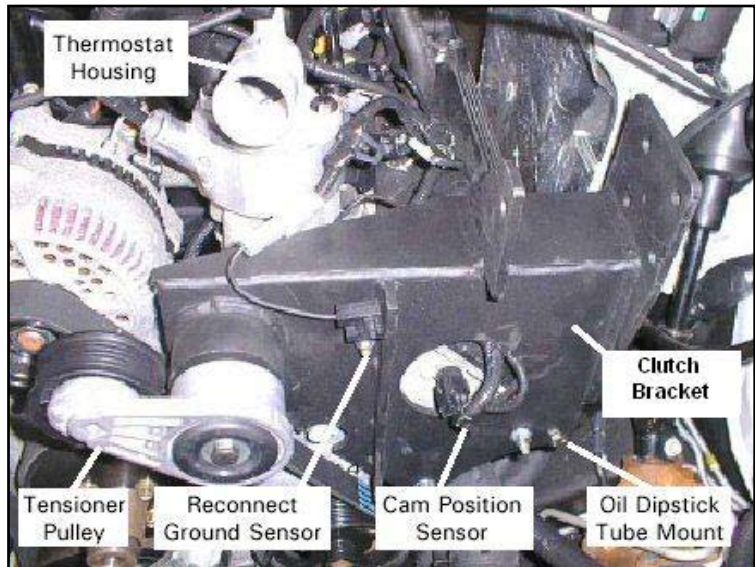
Route Ground Sensor through Hole with Cam Position Sensor
